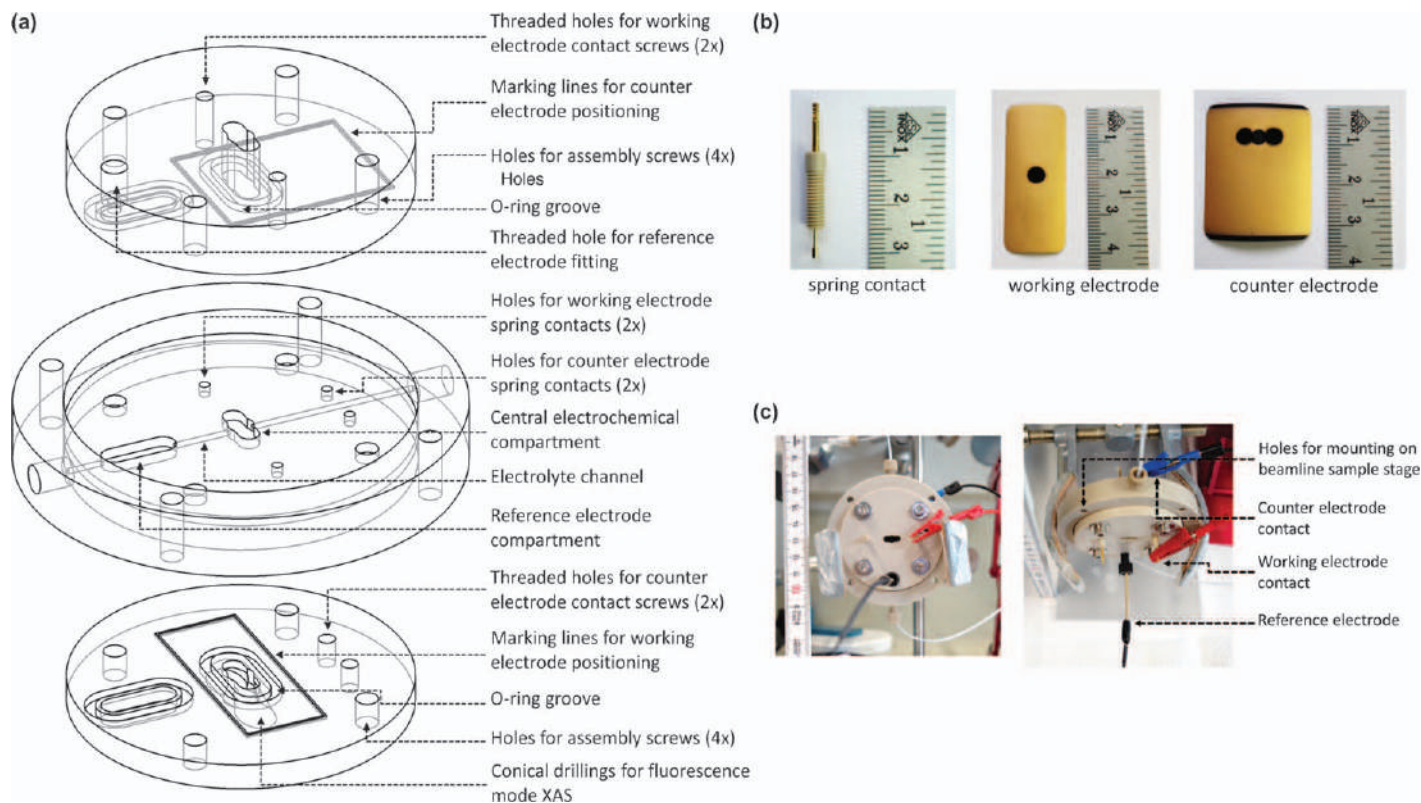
(a) Exploded view of a XAS flow cell, (b) spring contact and Kapton tape spray-coated working and reference electrodes, and (c) assembled view of the cell.
